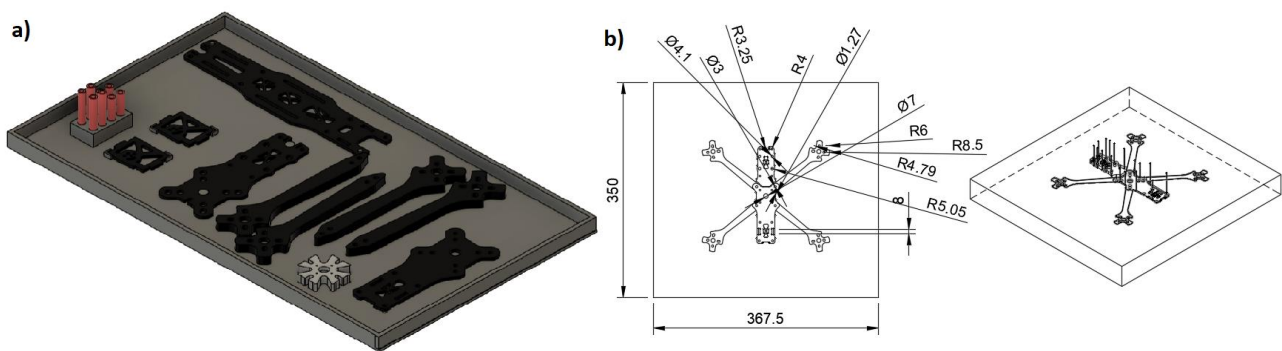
A box with parts for the FPV drone body – a) 5-inch drone body assembly table - Technical drawing – b). Source: authors
